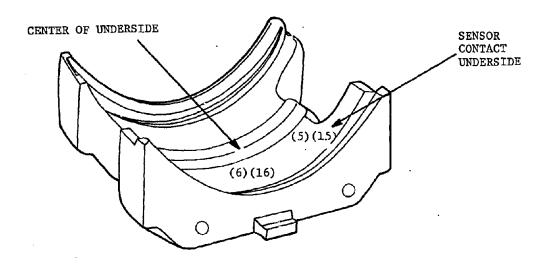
BEARING ADAPTER THERMOCOUPLE LOCATIONS
